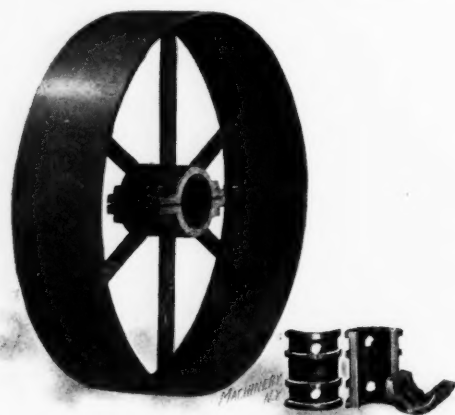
Six-arm Single Latshaw Steel Pulley.
